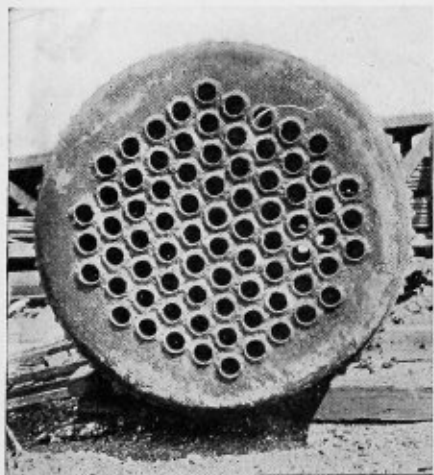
Set of Flues Welded to Top Flue Sheet of Pump Boiler
